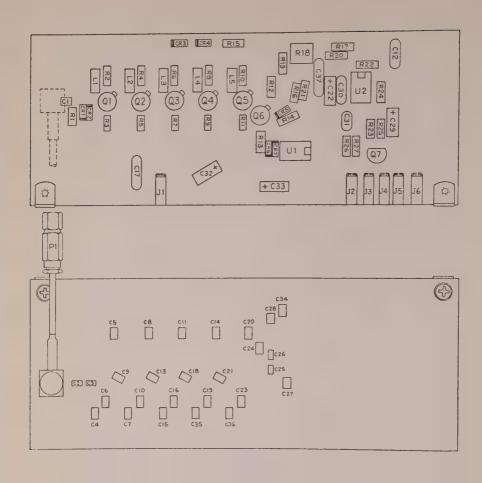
MODELS 6242A/6244A A4, 512 MHz PRESCALER PC ASSEMBLY #05706301 Rev D
